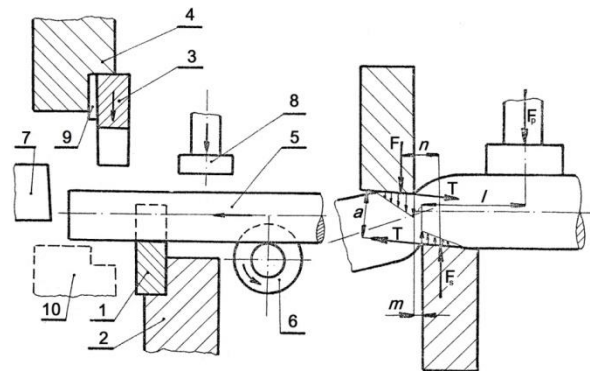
Scheme of cutting round bar steel: 1 - lower knife, 2 - machine frame, 3 - upper, 4 - slider, 5 - cut bar, 6 - conveyor with rollers, 7 - folding stop, 8 - hydraulic holder, 9 - knife washer, 10 - fixed stop
